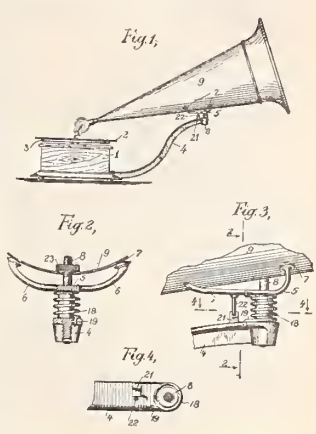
is an elevation of a talking machine; Fig. 2 is a section through the support and cradle on line 2—2 of Fig. 3; Fig. 3 is an enlarged detail view of some of the parts shown in Fig. 1; and Fig. 4 is a detail view in section on line 4—4 of Fig. 3.
